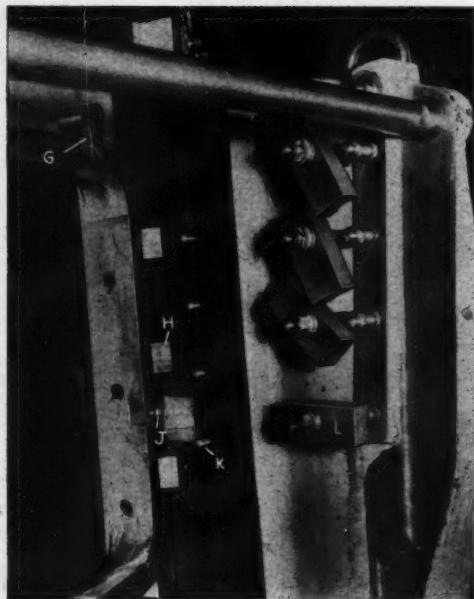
Set-up on a Cincinnati No. 4 horizontal milling machine for facing internal bearing pads in the Avon thrust reverser outlet duct. The machine is fitted with a special Rolls-Royce head
